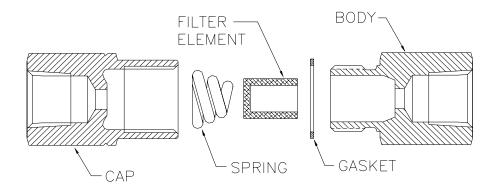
Inline Filter with Sintered Element Exploded View purchased prior to July 1, 1993
